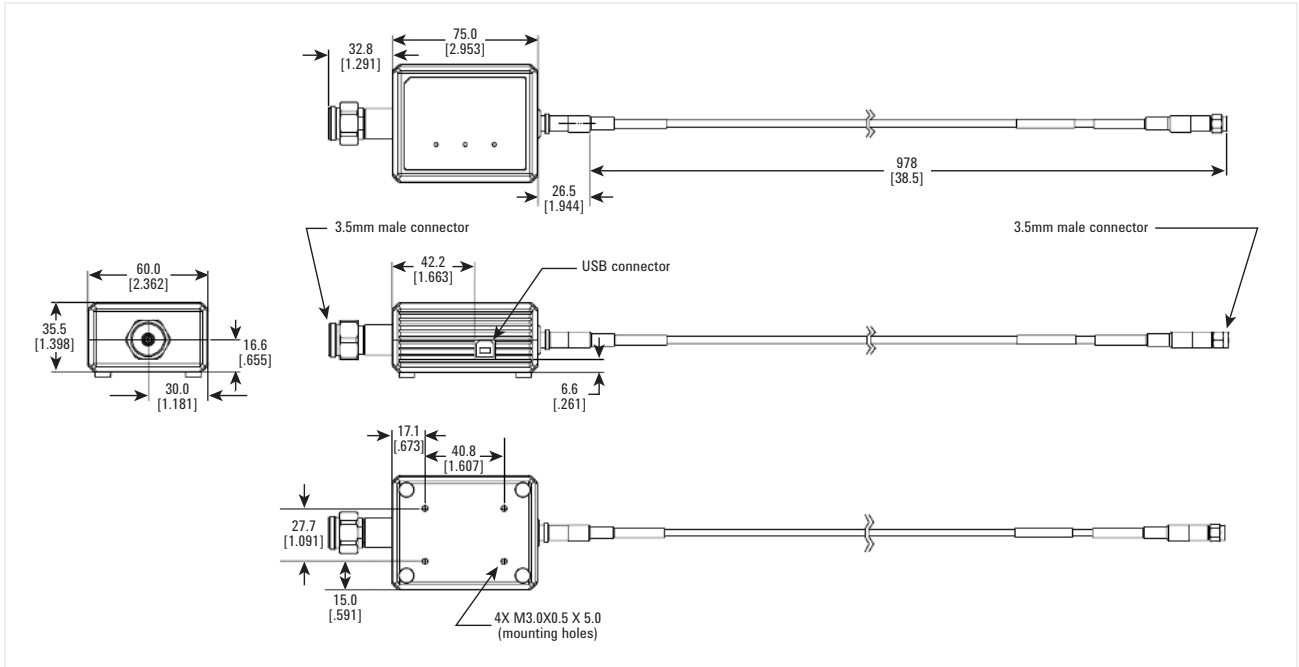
Mechanical dimensions for U7227A and U7227C USB preamplifiers
